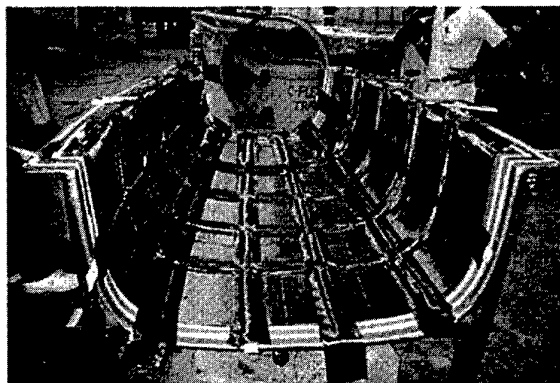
Vacuum assisted resin transfer molding tooling for fuselage section.
